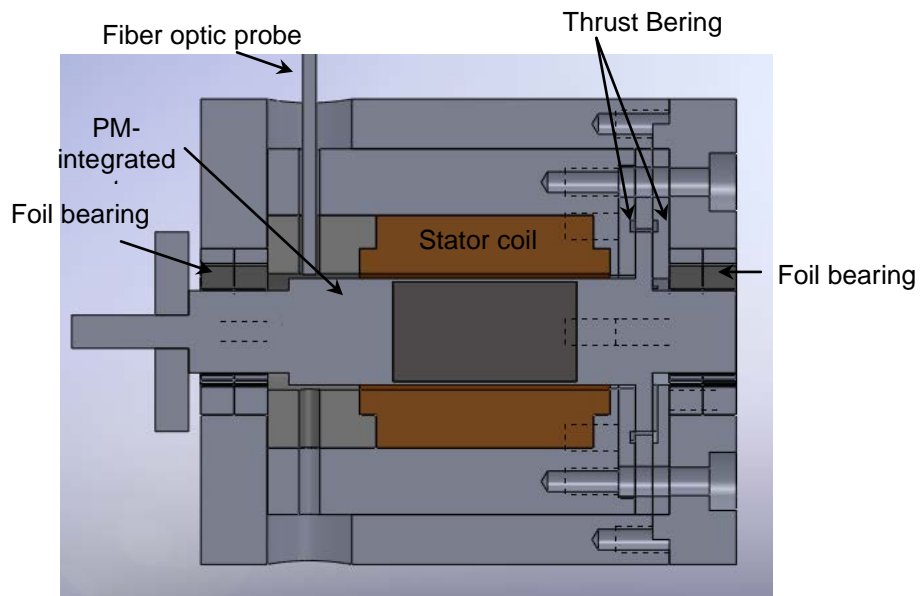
Cross section of assembled motor drive with foil bearings; cooling jackets are now shown
